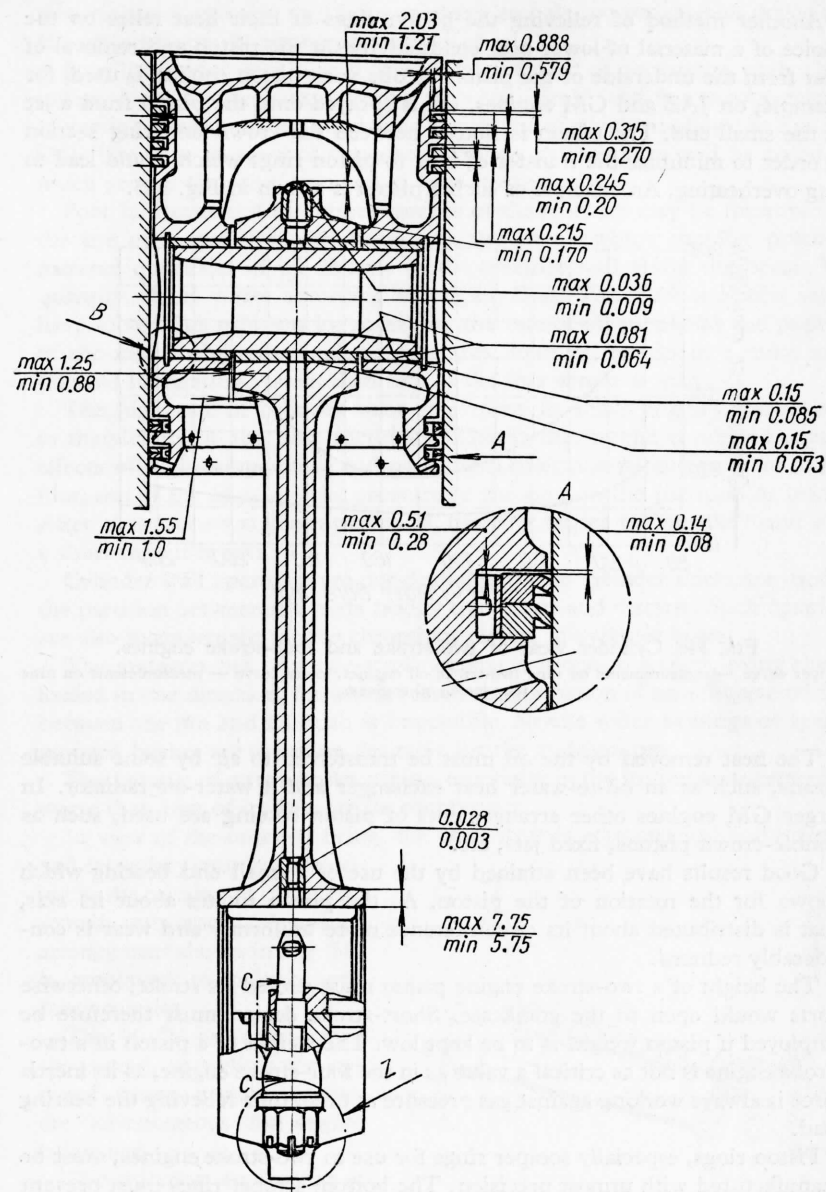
Piston of the Soviet two-stroke JAZ 204 engine.
